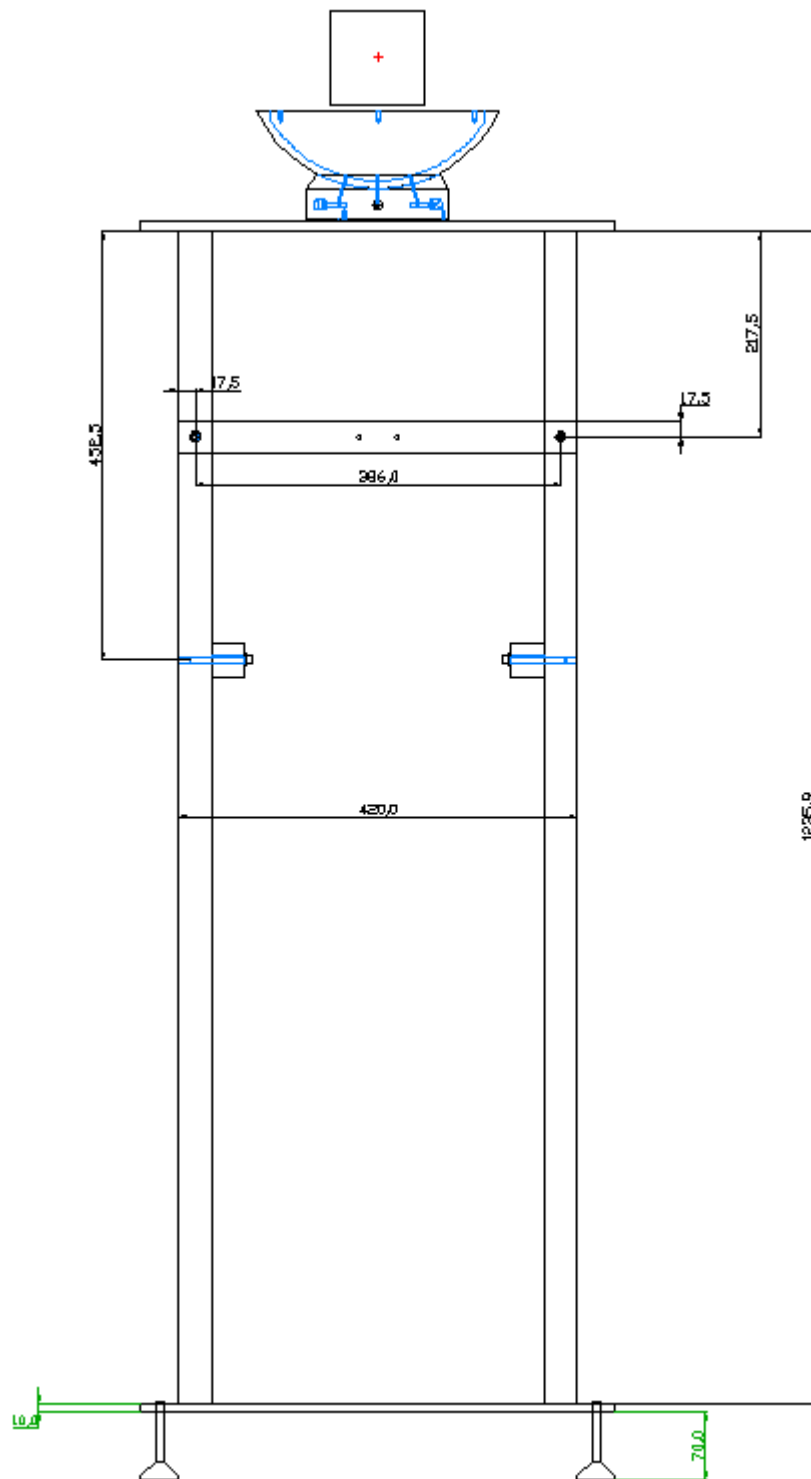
Spherical Air Bearing with Pedestal and Payload Sample
